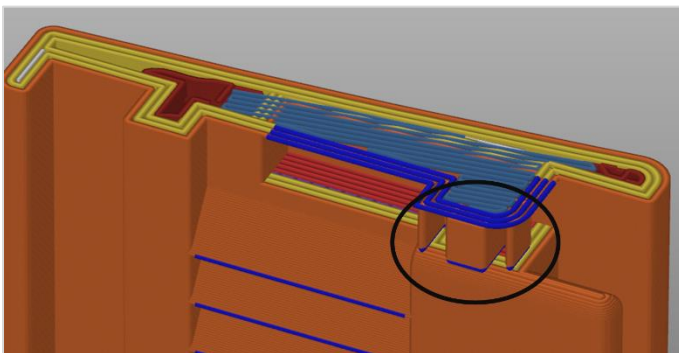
Cut View of the Printing Model with the CAD Support Signalled
